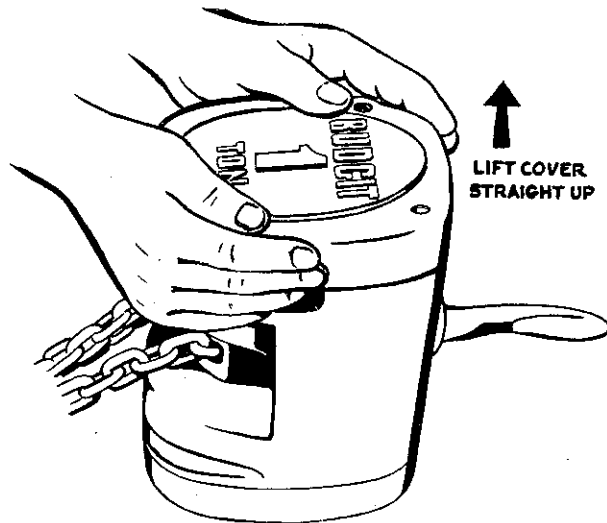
FIG. A. REMOVING CHAIN WHEEL GUIDE COVER
